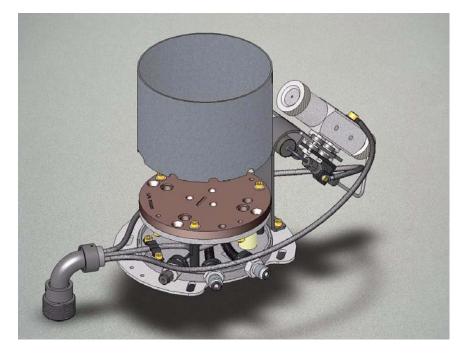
Remove the Body from the Base Assembly. The base assembly contains the source's magnet and connections for power, gas and coolant.
